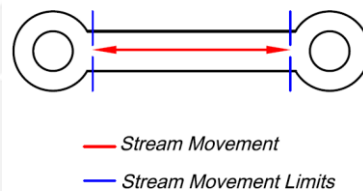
Pouring movement of elastomer stream in circular molds.
